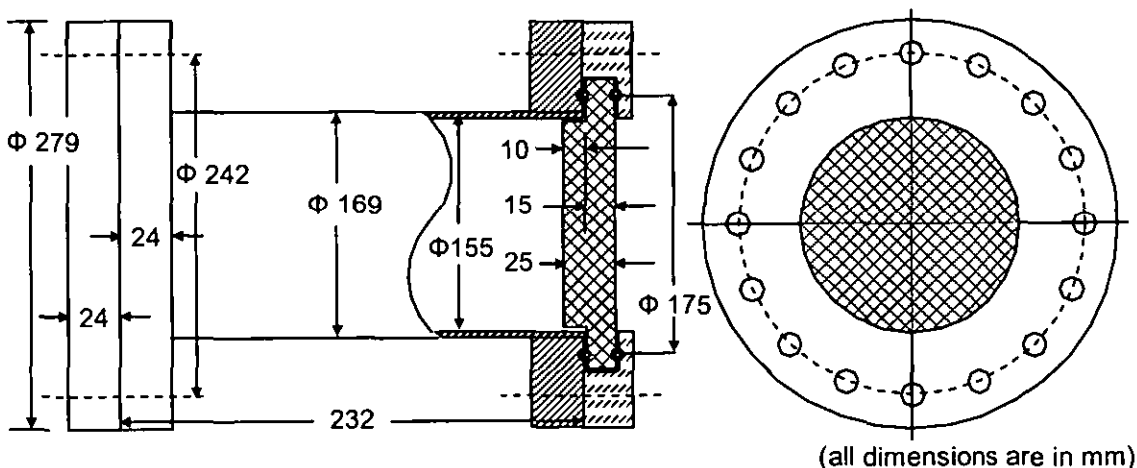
Details of the windows and the flange assembly for the cylindrical combustion chamber
